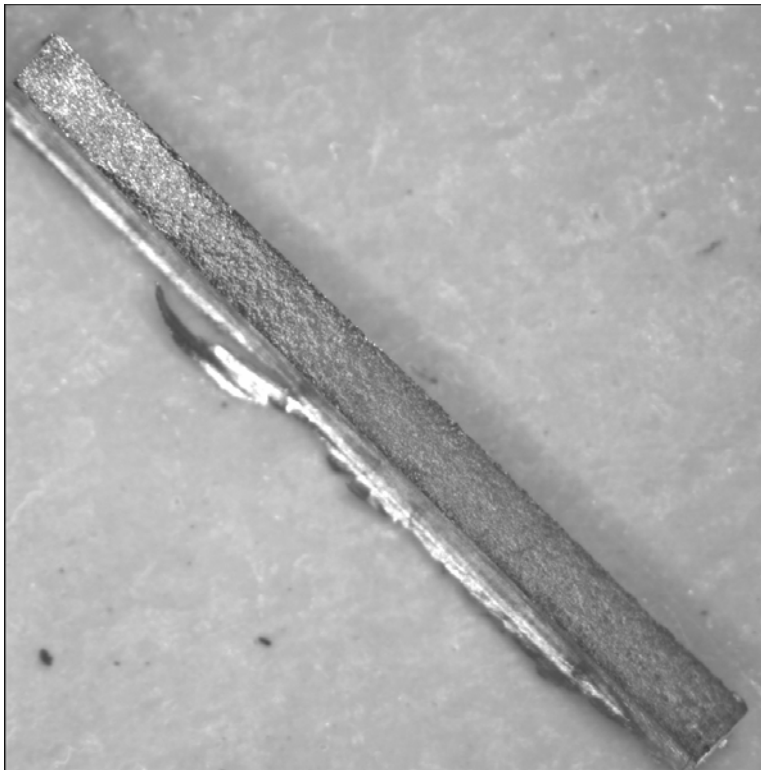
Fracture Surface from Specimen 5871.
